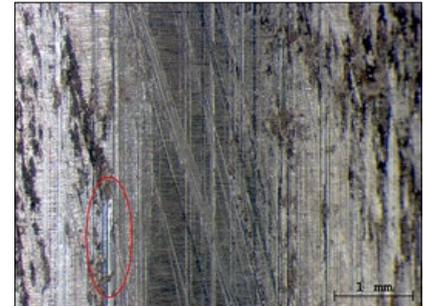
Detail of Fig. 8, showing start of deep groove of cold welded Ti6Al4V (Courtesy Arburg)
